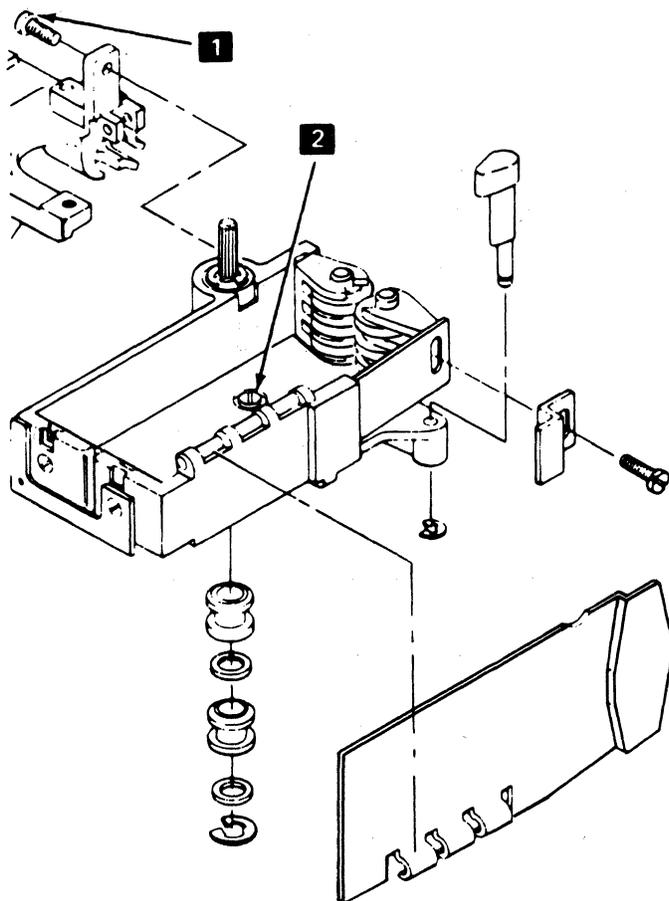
Ribbon Drive Removal (Ribbon-Box Machines)
